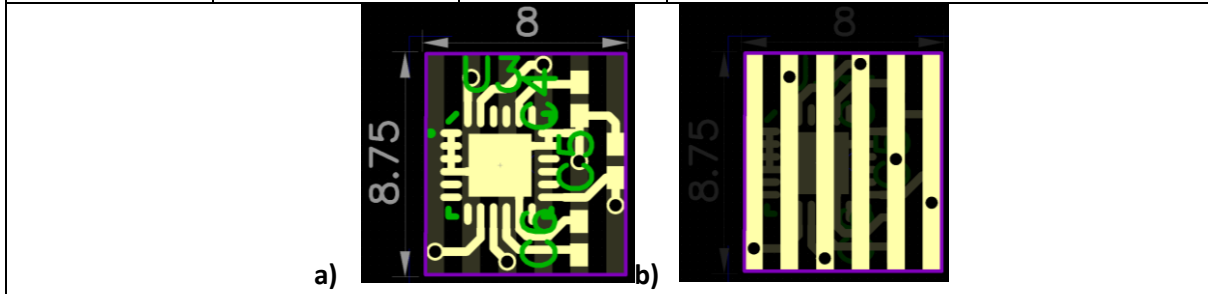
'I2C compact PCB' design a) top layer b) bottom layer
